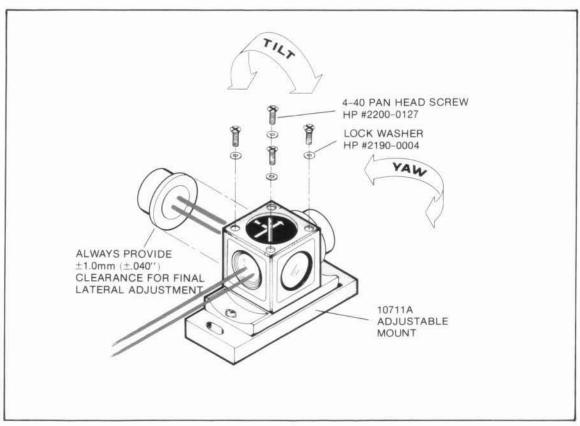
Horizontal Plane Mounting Using the HP 10711A Adjustable Mount
